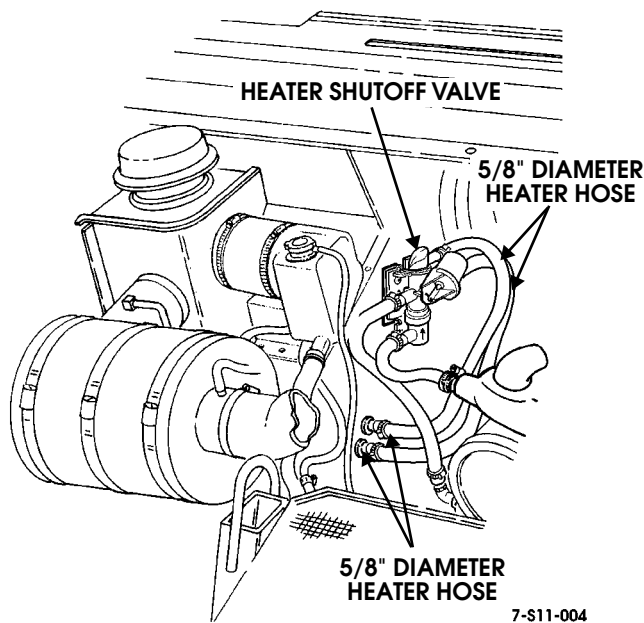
Heater Hose Routing Without Auxiliary Unit
